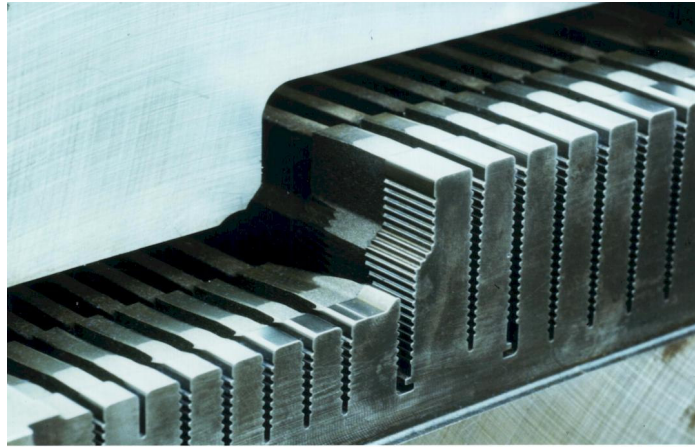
Heat Sink Die Manufactured using the Autotool Process
